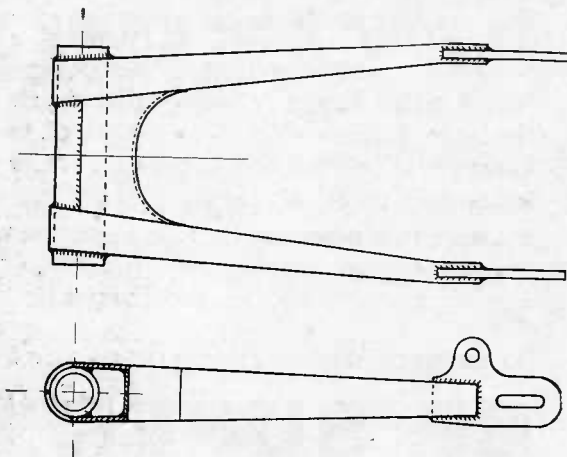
(right): Plan and elevation of a swinging fork with legs of tapered square-section tubes.
